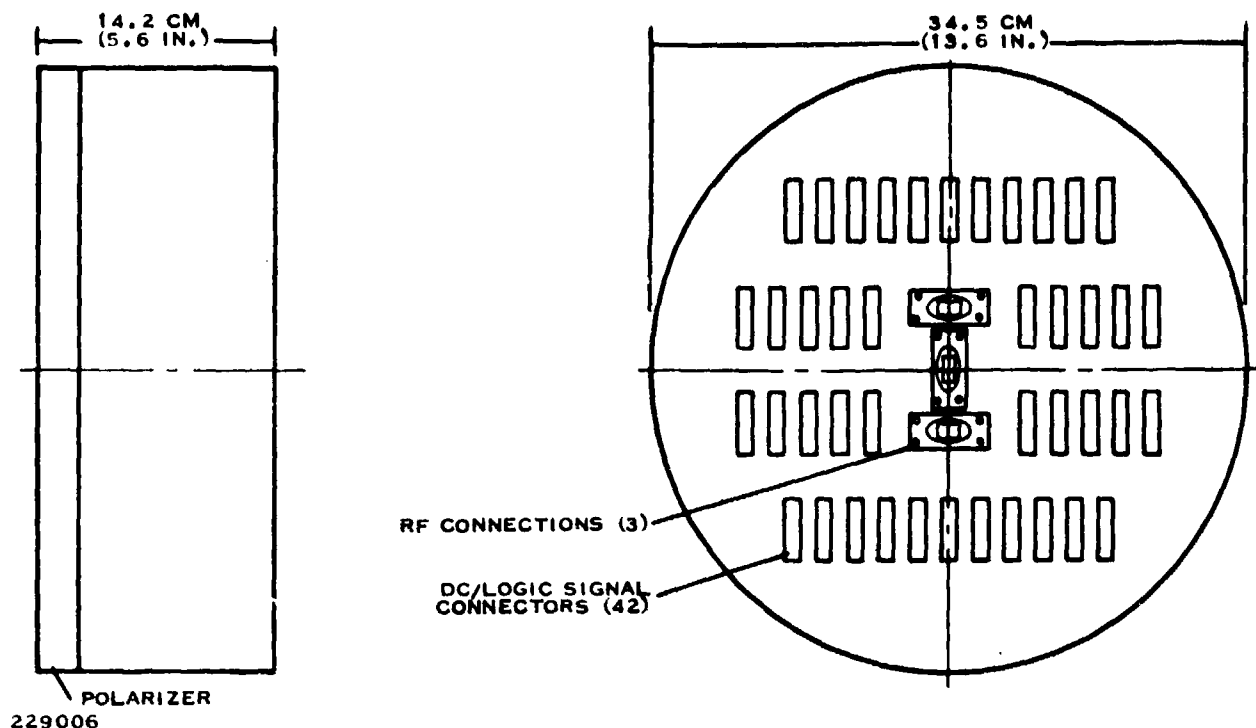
Flat Plate Fed Array Outline Dimensions
